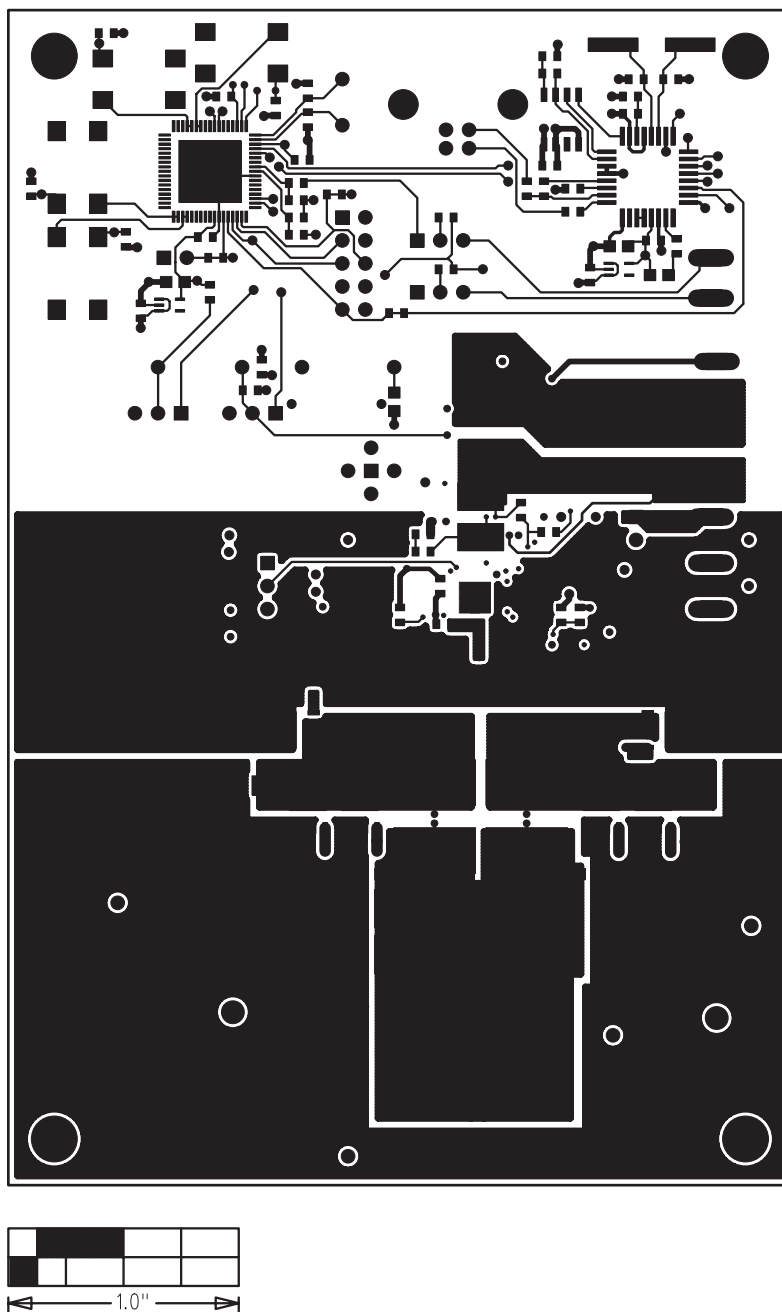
MAX17480 EV Kit PCB Layout—Component Side
